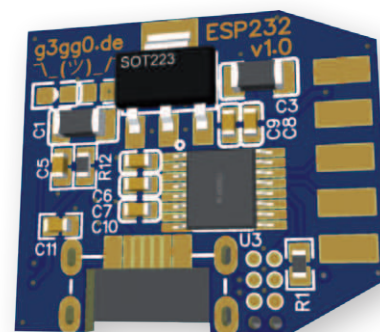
This small PCB with easily accessible pads is ideal for hand soldering SMD chips.
